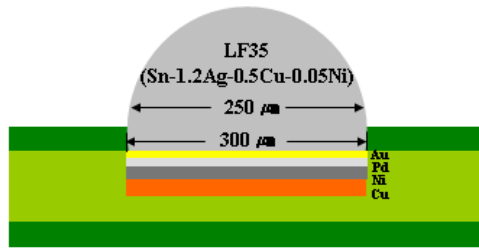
Schematic diagram of solder joint between a solder ball and ENEPIG surface finish.
